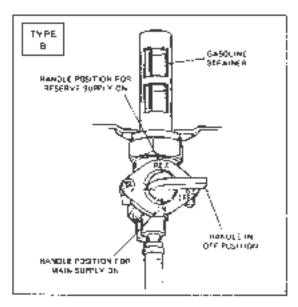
Single Handle Type Fuel Supply Valve and Strainer
